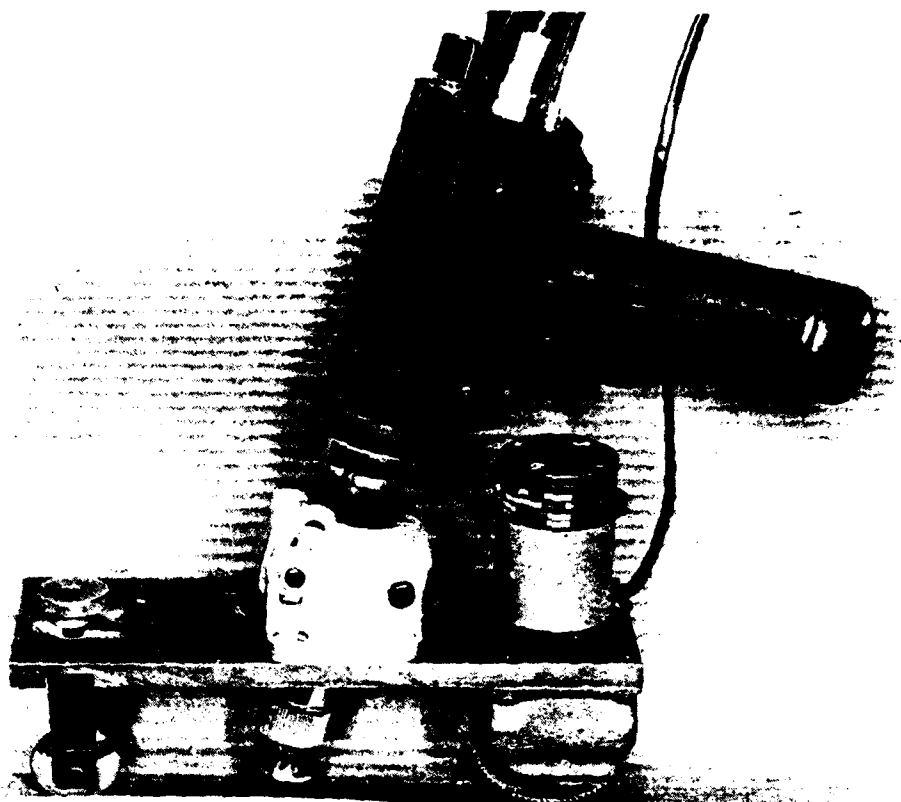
(770403-1) Automatic Panel Welding Equipment
